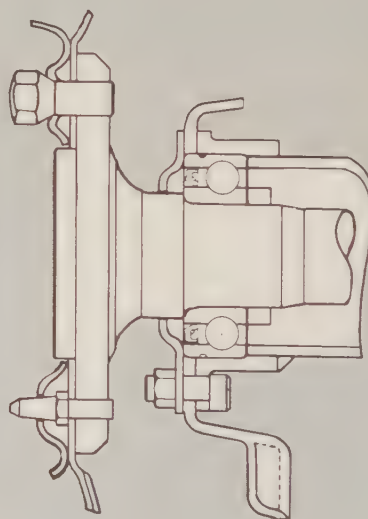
An automotive rear wheel mounting is another application which demonstrates some of the advantages of the integral seal bearing. In the installation shown above, a single, spring-loaded, lip-type seal is used on the outside face of the bearing. This permits the bearing to be lubricated from the opposite side by the oil employed in the differential housing. This same seal provides sufficient protection from outside contaminants to eliminate the need of any other supplementary seal. Automotive designs vary and this rear-wheel application often utilizes ball bearings which are double sealed and prelubricated with a suitable grease.
